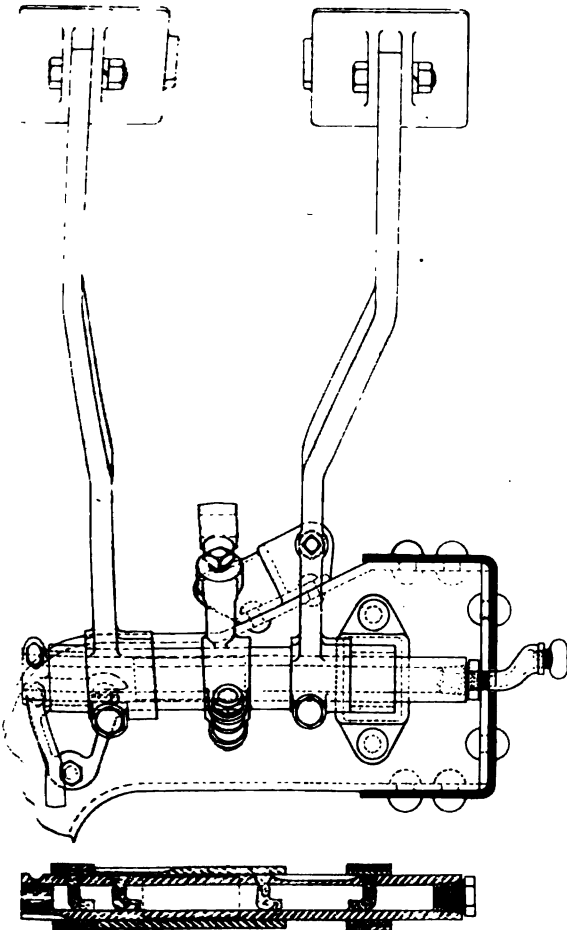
Clutch and brake assembly showing four bearing surfaces lubricated from same reservoir with one point of filling
